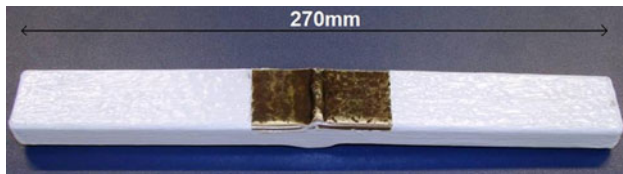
Corrosion-fatigue tests specimens showing weld root area which was exposed to the environment during tests
